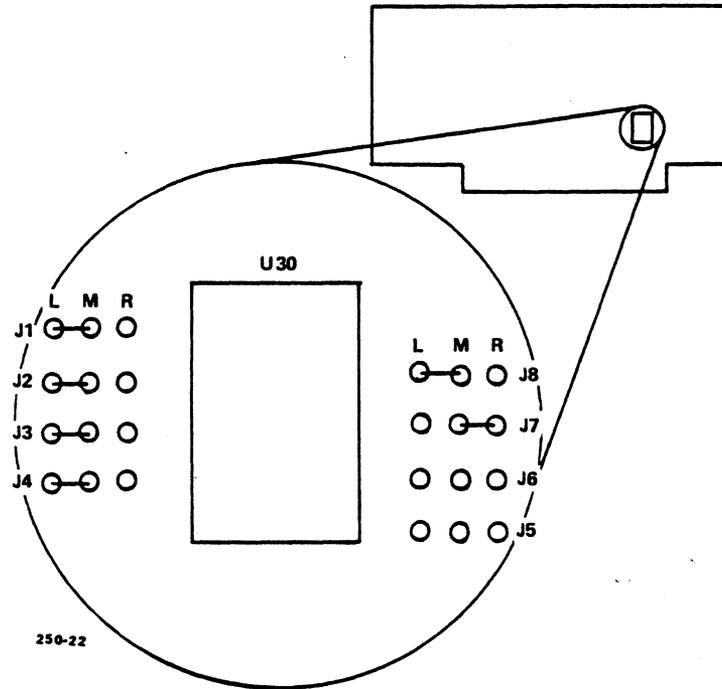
MX Jumper Location, Helical Scan Tape Drive
